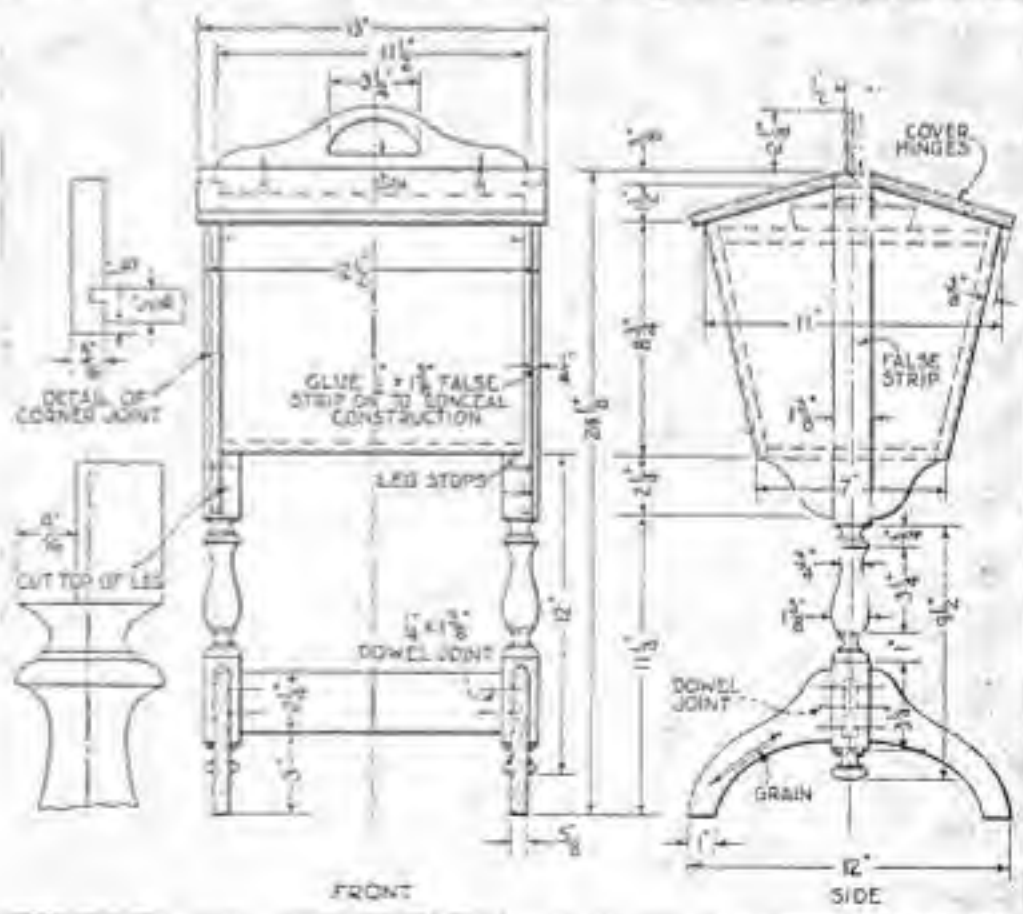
Assembly views of the Priscilla cabinet and details of the joints at the corners of the hopper and between the legs and end pieces.
